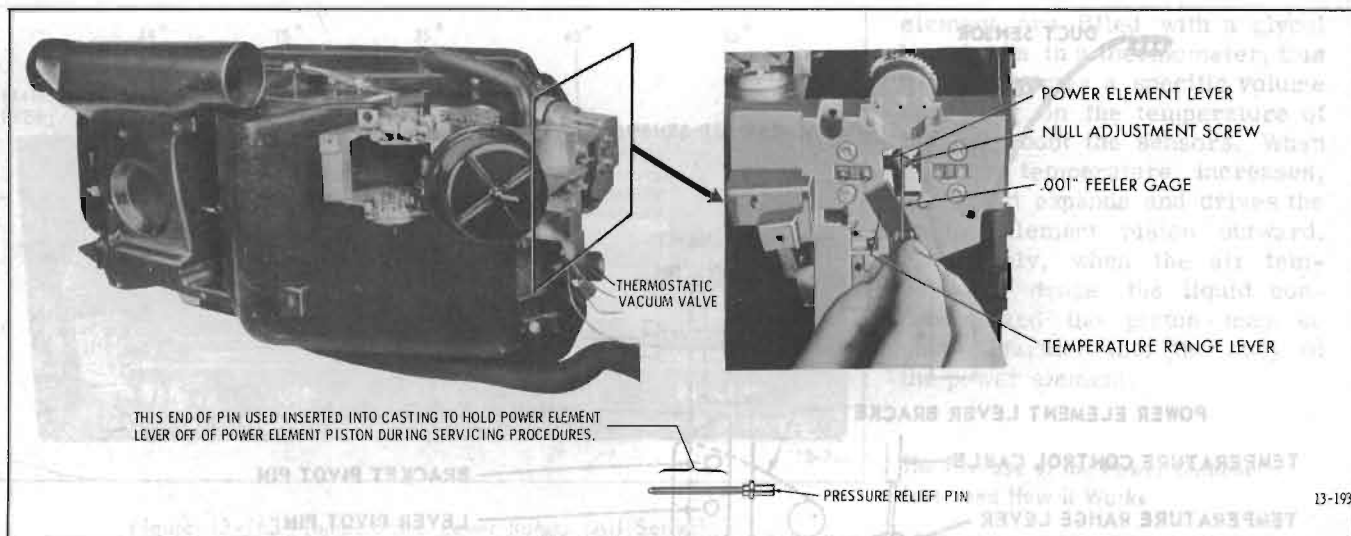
Checking Null Clearance with Feeler Gauge (All Series)
